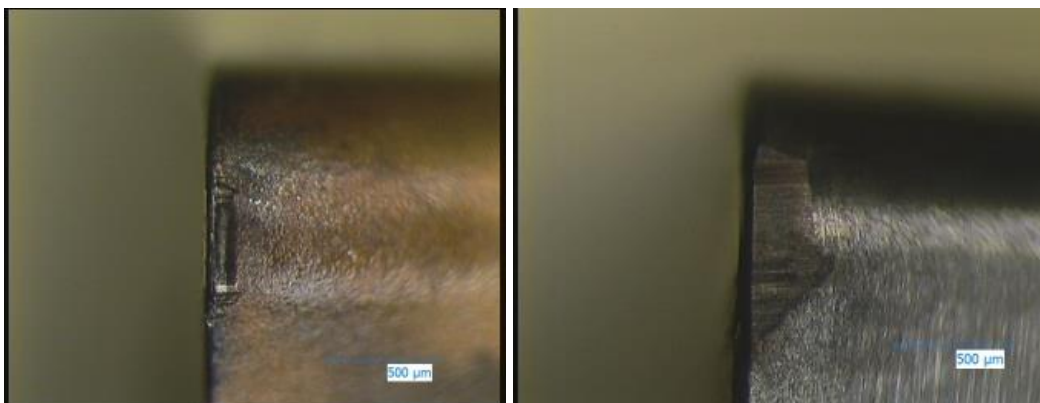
Micrographs of the flank side of used cutting tools from tool life tests of the QL-H1 steel. (a) CC cutting tool and (b) CBN cutting tool. (LOM)
